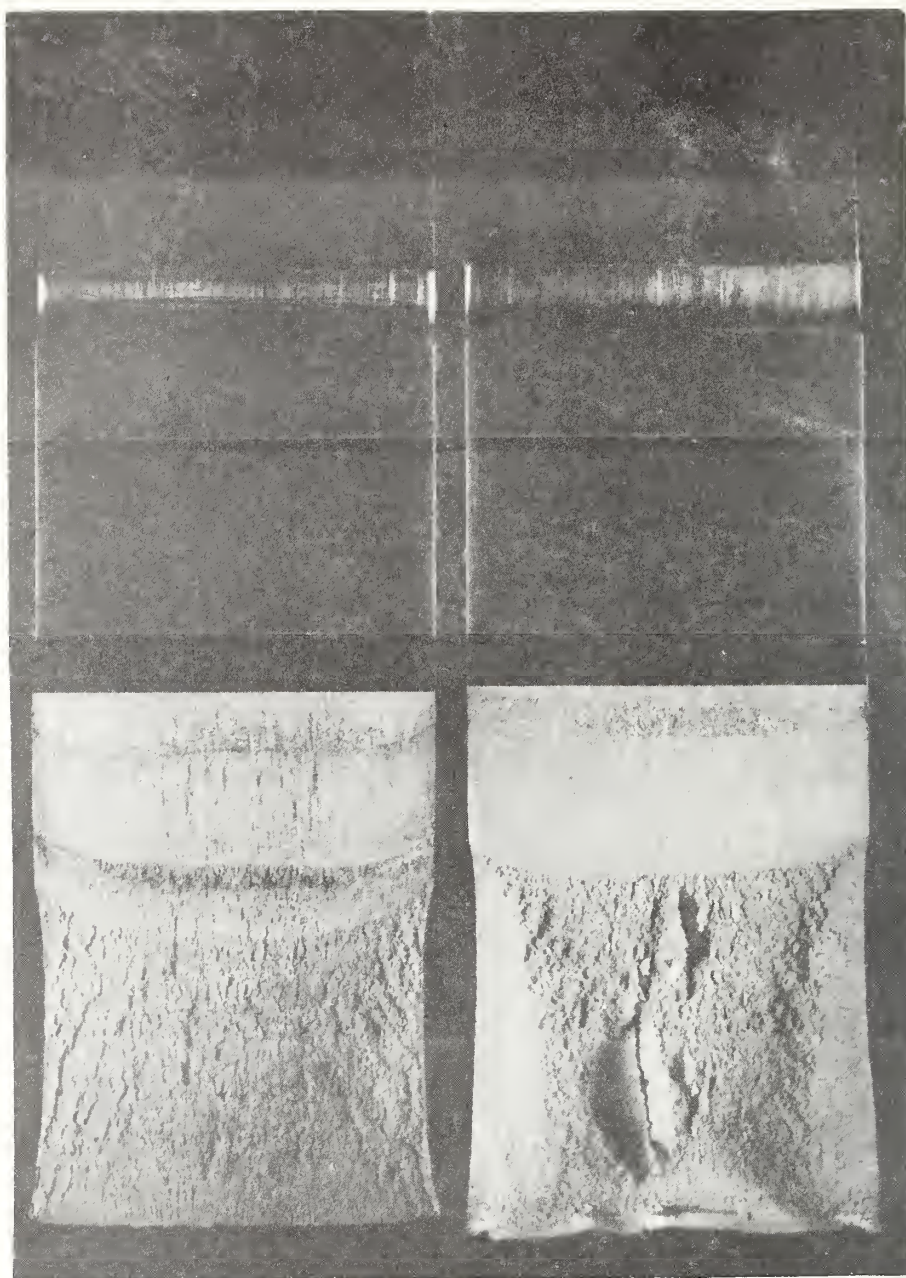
Fracture appearance of LT (left) and TL (right) specimens tested at 111 K.
